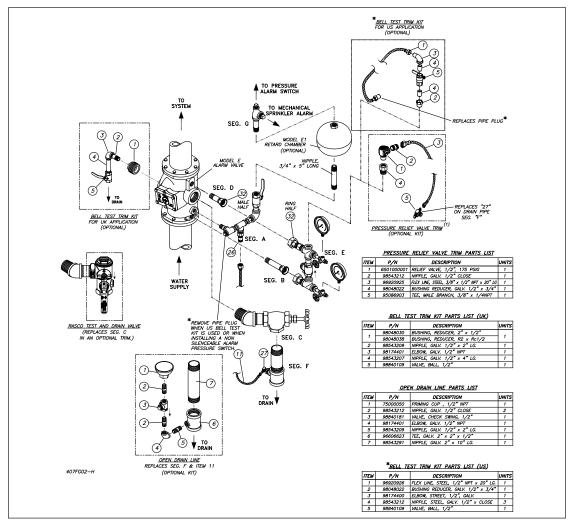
Model E 8" Flanged Inlet and Outlet Alarm Valve Variable Pressure Open Drain Trim
